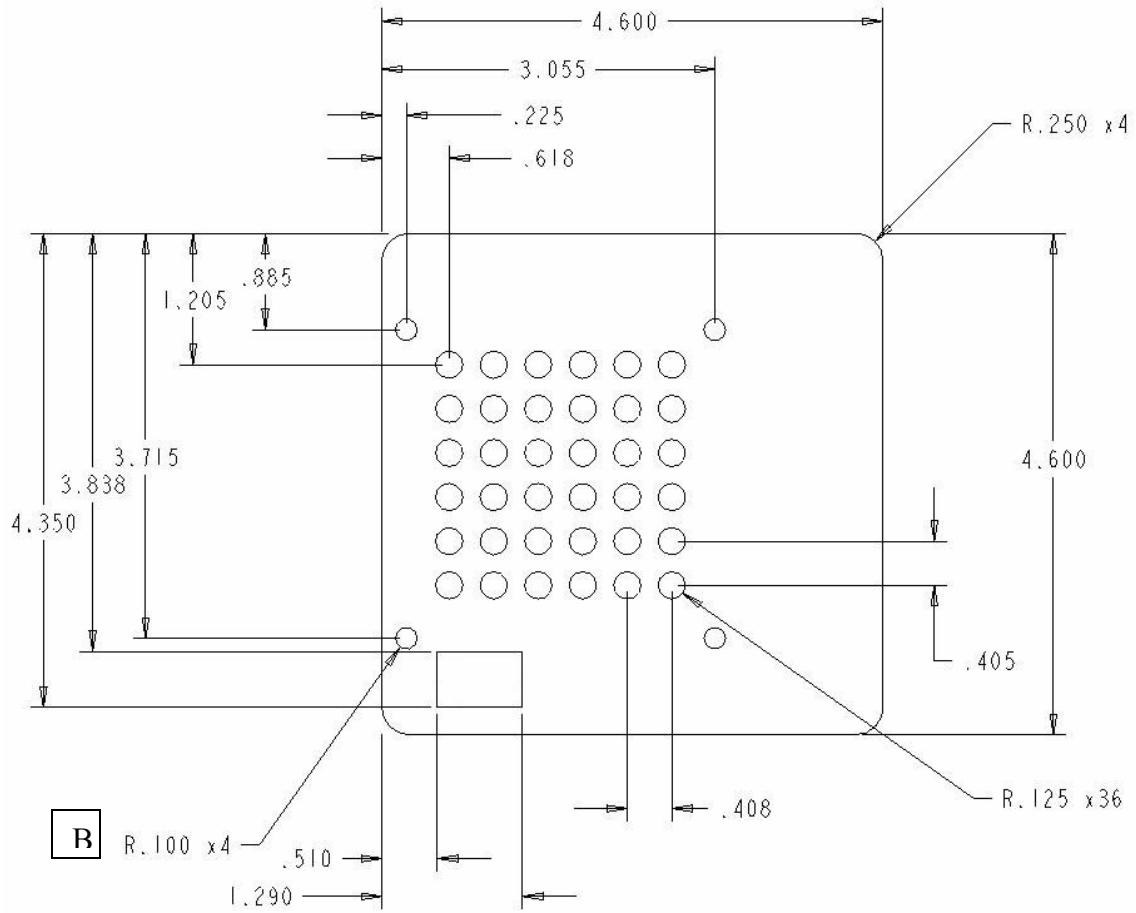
Dimensioned drawing of the left side Plexiglas piece
